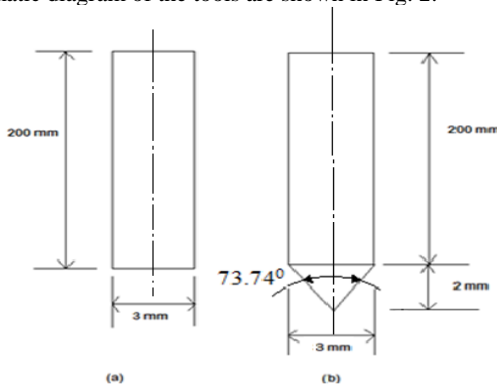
Schematic diagram of tool (a) Flat tool (taper angle 180°) (b) Tapered tool (taper angle 73.74°)
